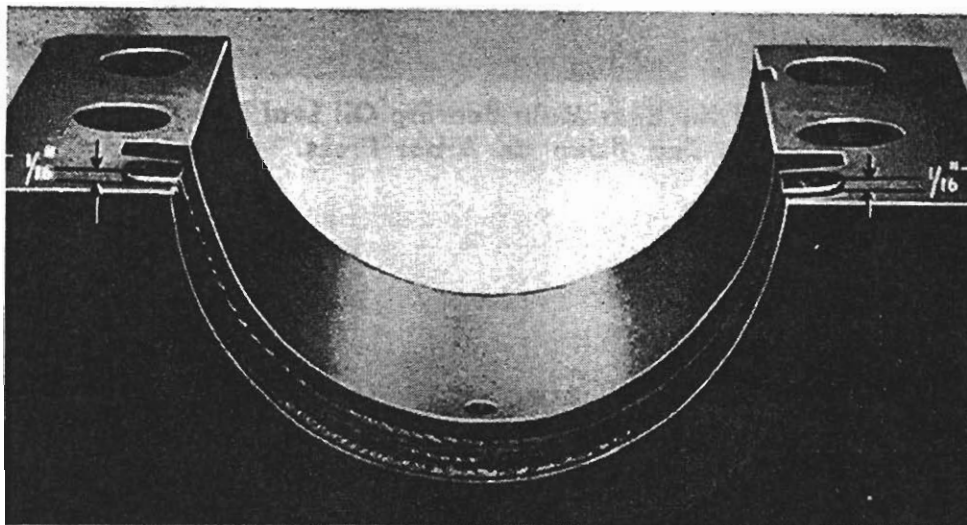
Each End of the Seal Should Be Trimmed to Obtain the Dimensions Shown.
